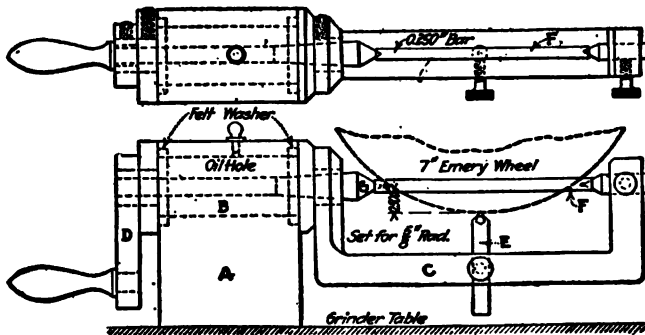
RADIUS WHEEL DRESSING FIXTURE
